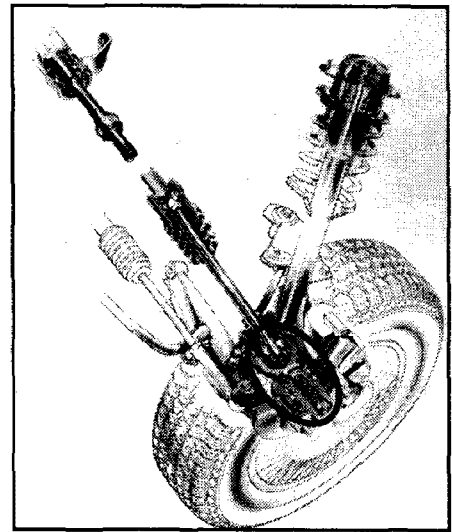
Front wheel assembly of car which is assembled with velocity joint
